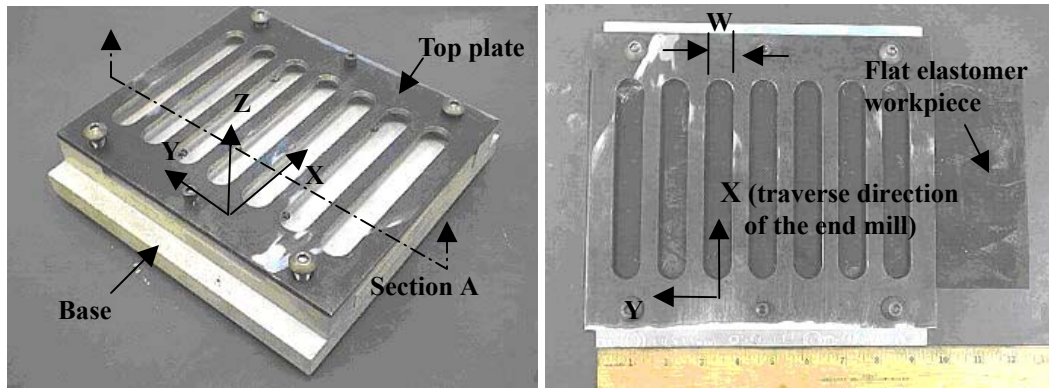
Fixture for end milling of elastomer A) base and top plate with slots and B) overhead view with elastomer workpiece.
